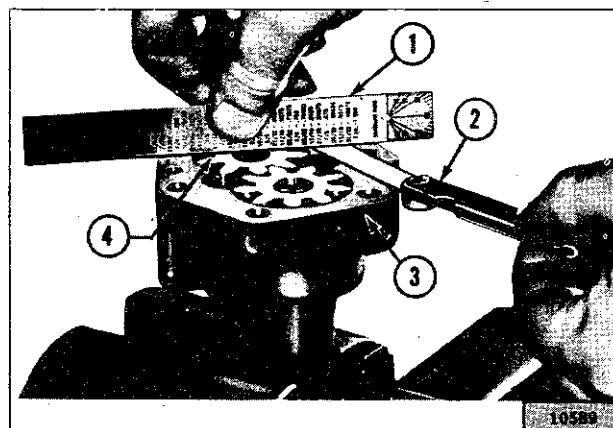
CHECKING GEAR TO COVER CLEARANCE
